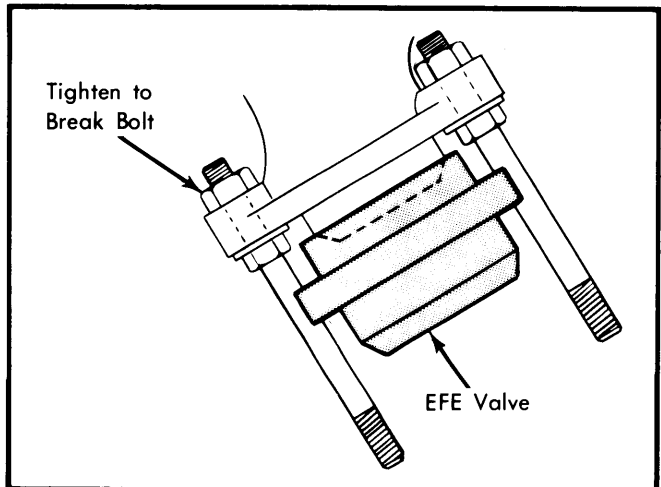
Exhaust Manifold Flange Bolts (Right Side Only)
